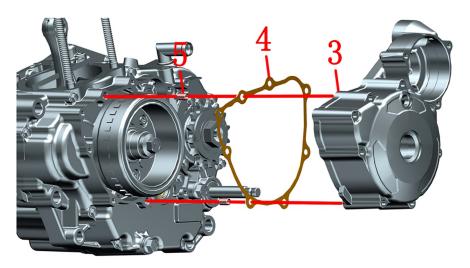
LEFT CRANKCASE		Remove left crankcase cover 3	CHK
